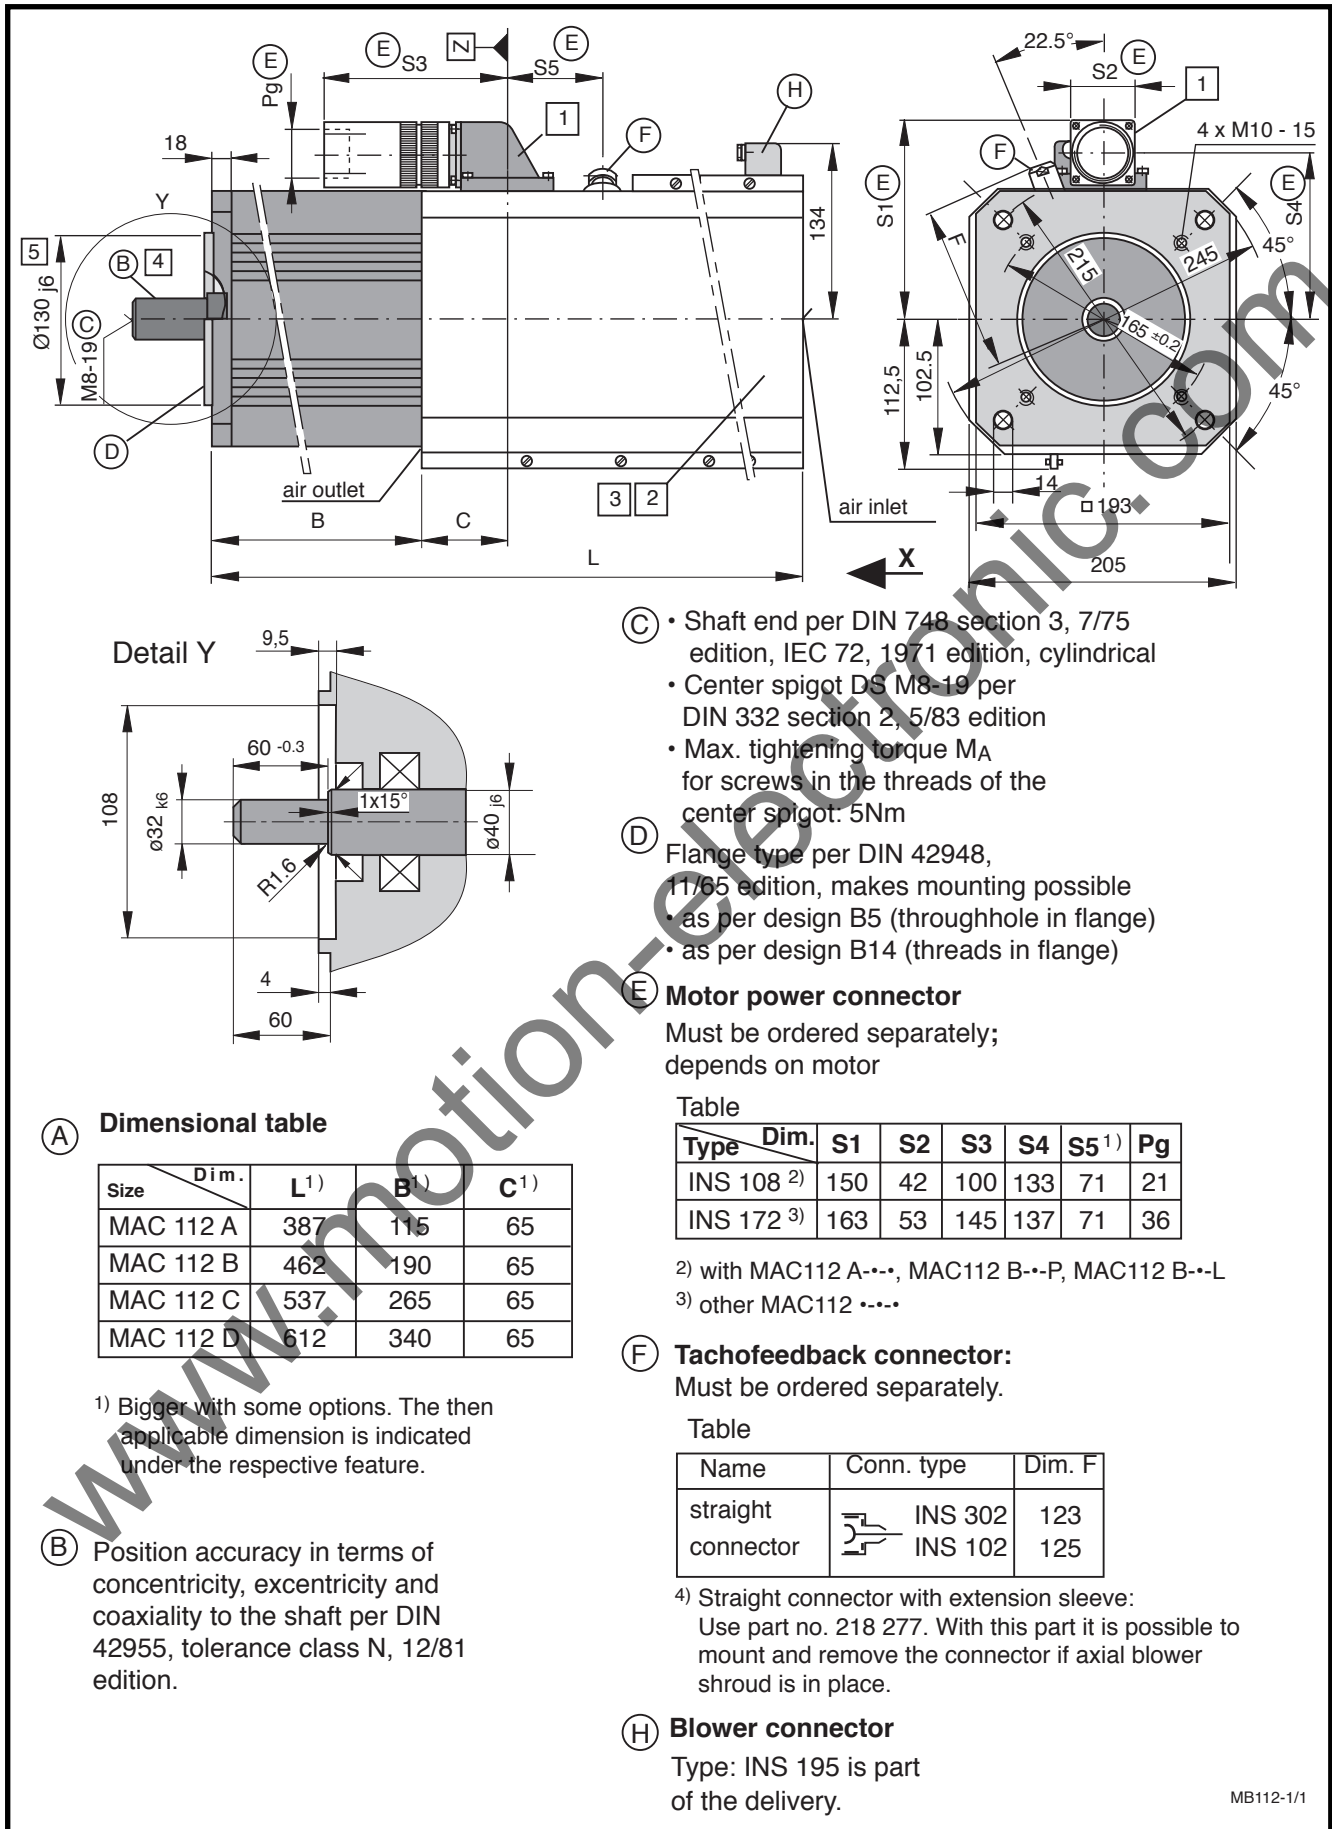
Dimensional data - MAC 112 (axial cooling)
